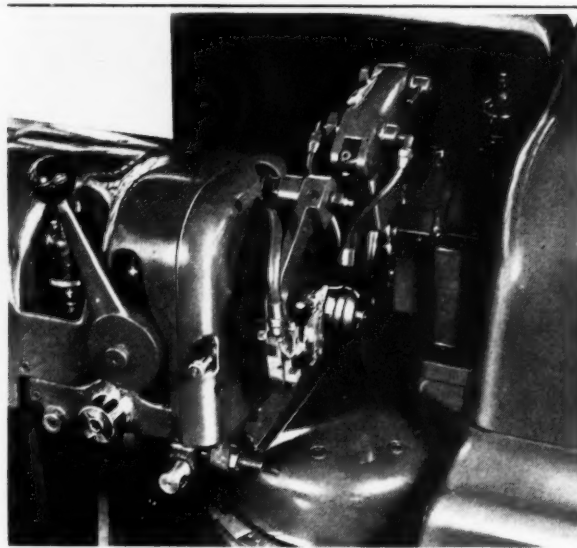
Machine Shown in Fig. 1 Equipped for Grinding External Raceways
